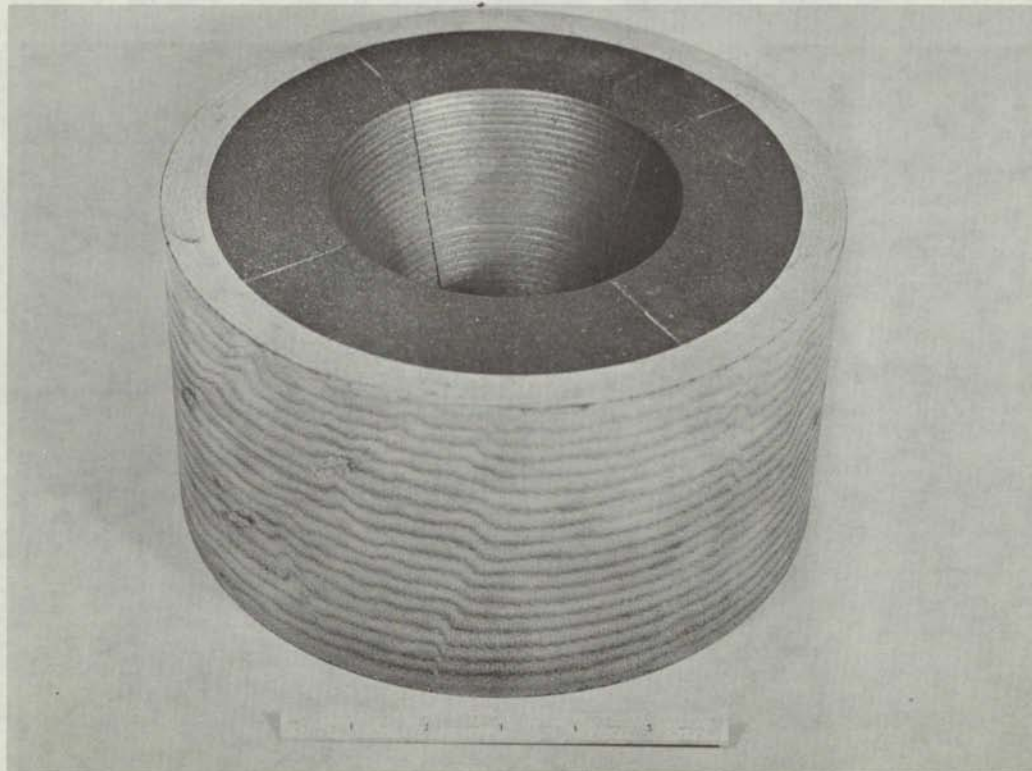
TU-622 Segmented LCCM-2626 Exit Cone (View A)
